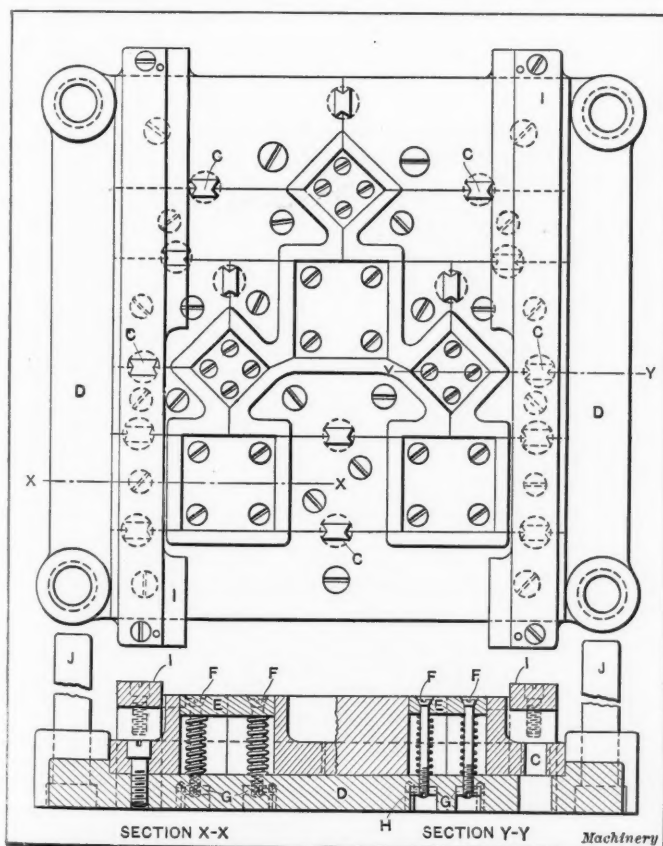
Plan and Sectional Views of Blanking and Piercing Dies
